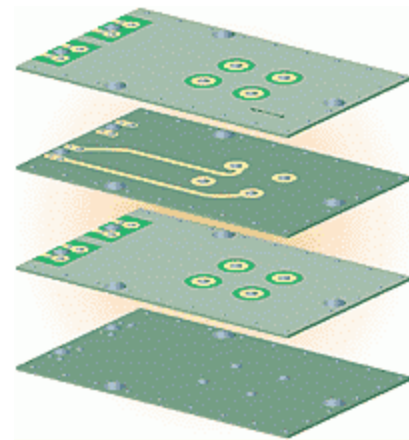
Five layers/four boards are used to form the multilayer stripline circuit board.
